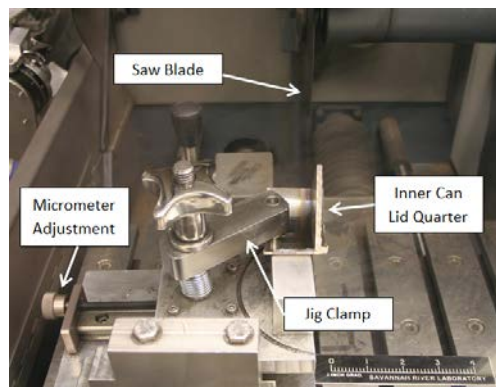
Specialized cutting jig for holding the inner can lid section for quartering and removal of the closure weld
